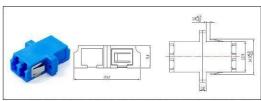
LC SC Footprint Duplex Adaptor Appearance & Dimension
